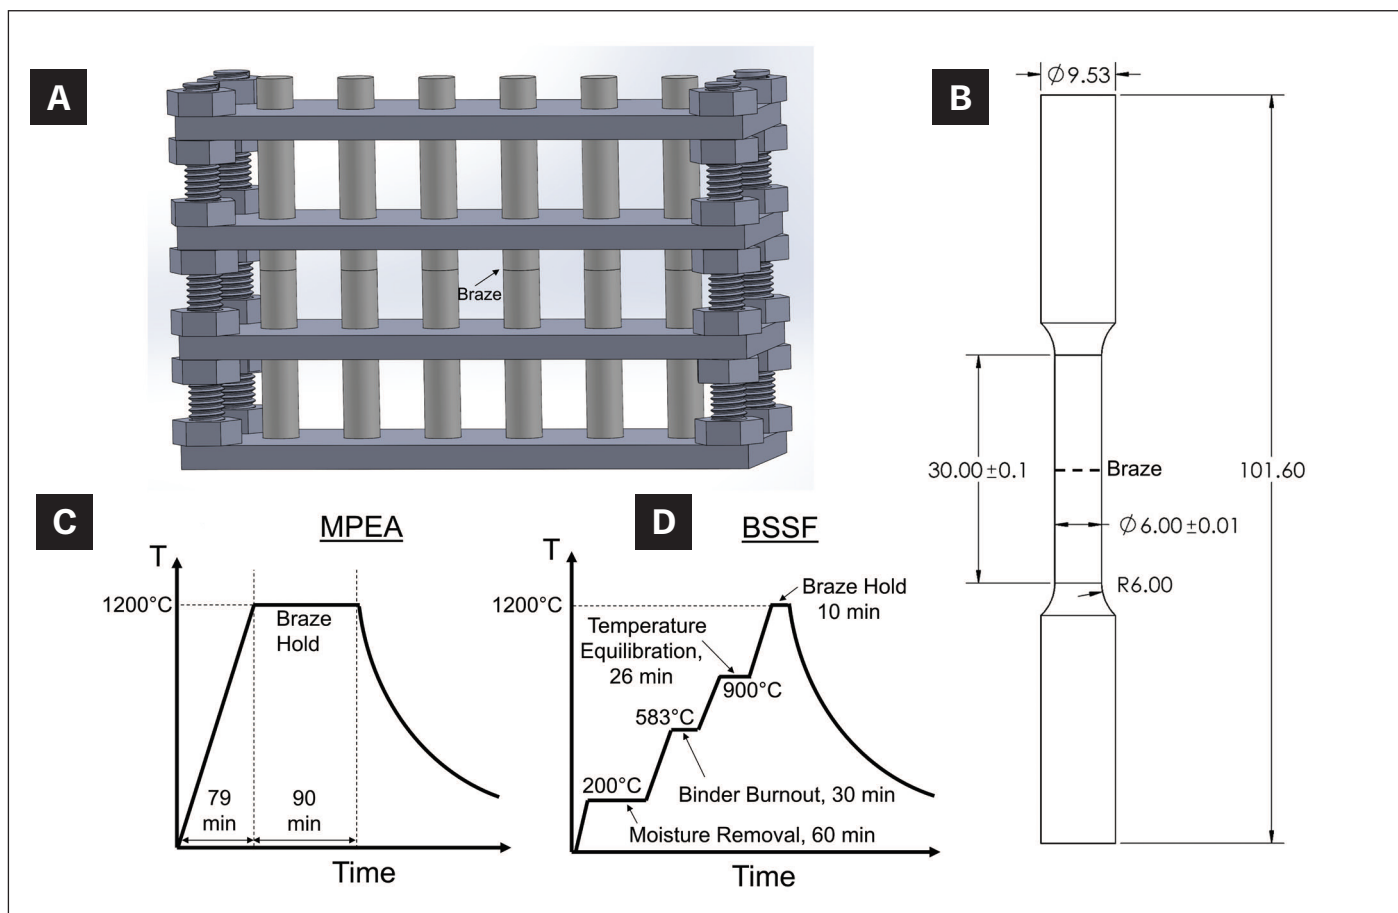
A — Schematic illustration of the fixturing assembly employed during brazing; B — drawing of the ASTM E8M specimen machined from each butt joint, where the dimensions are in mm; C, D — thermal profiles employed for brazing with the MPEA filler (C) (Ref. 17) and BSSF filler metal (D) (Ref. 34).
